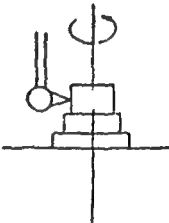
Checking the parallelism of milling machine table and spindle axis.
